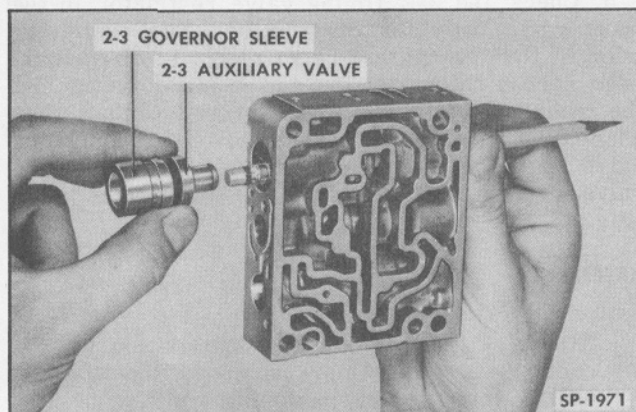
Removing 2-3 Governor Sleeve and 2-3 Auxiliary Valve
